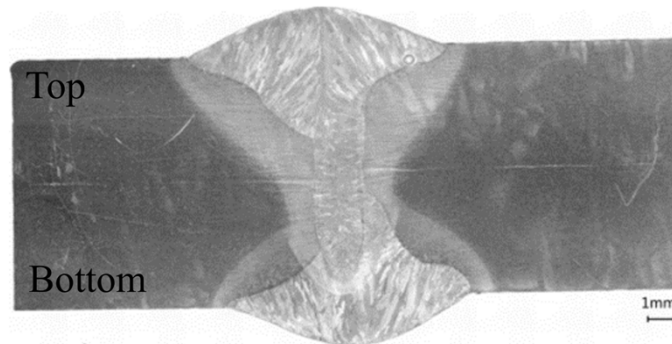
Cross sectional macrograph of HLAW weld.
